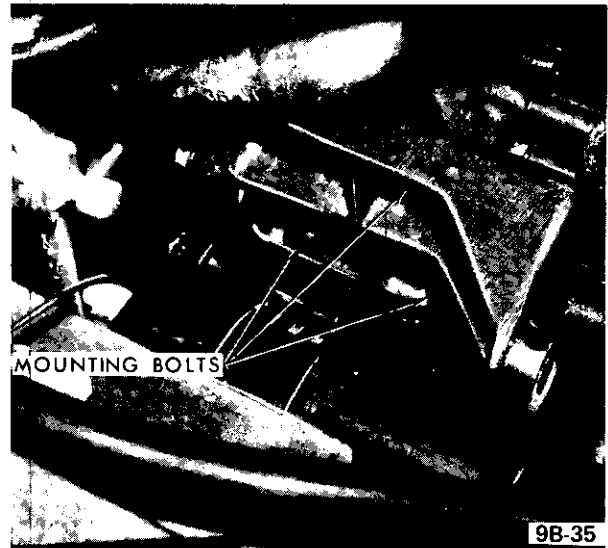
B-52 Location of Compressor Mounting Support Bolts Opel 1900 Manta
